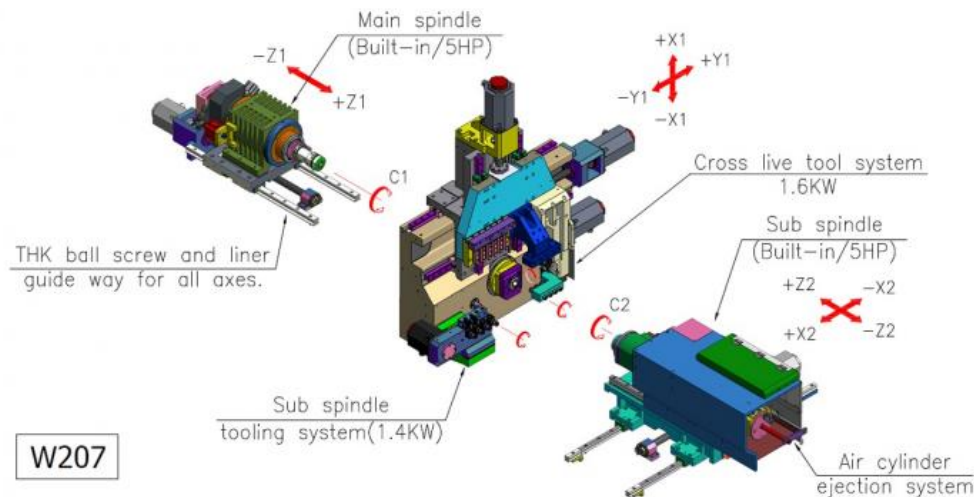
An example of a modern machine tool, a 7-axis swiss-style lathe [10]
